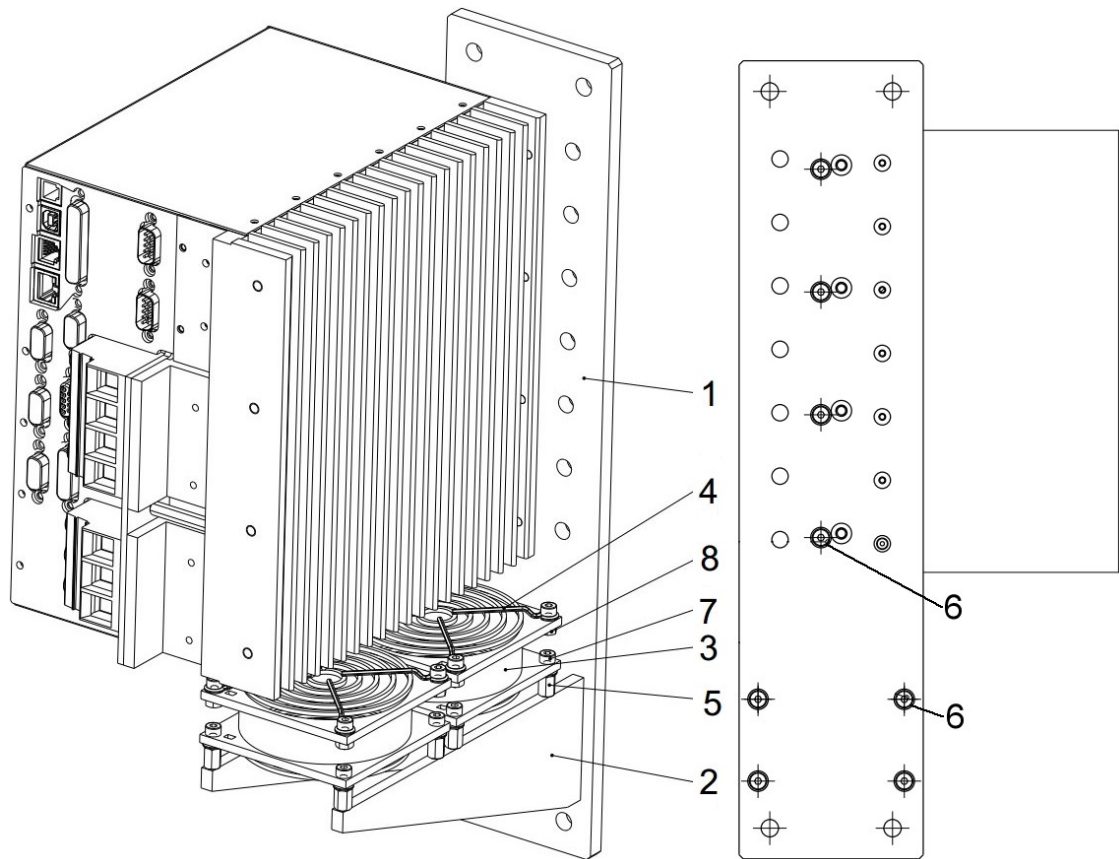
Mounting drawing for 188 x 189 mm base plate
